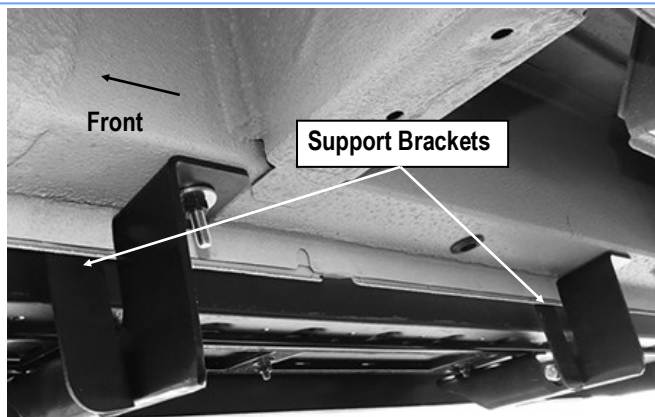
Passenger Side 2nd & 3rd & 4th Mounting Locations
